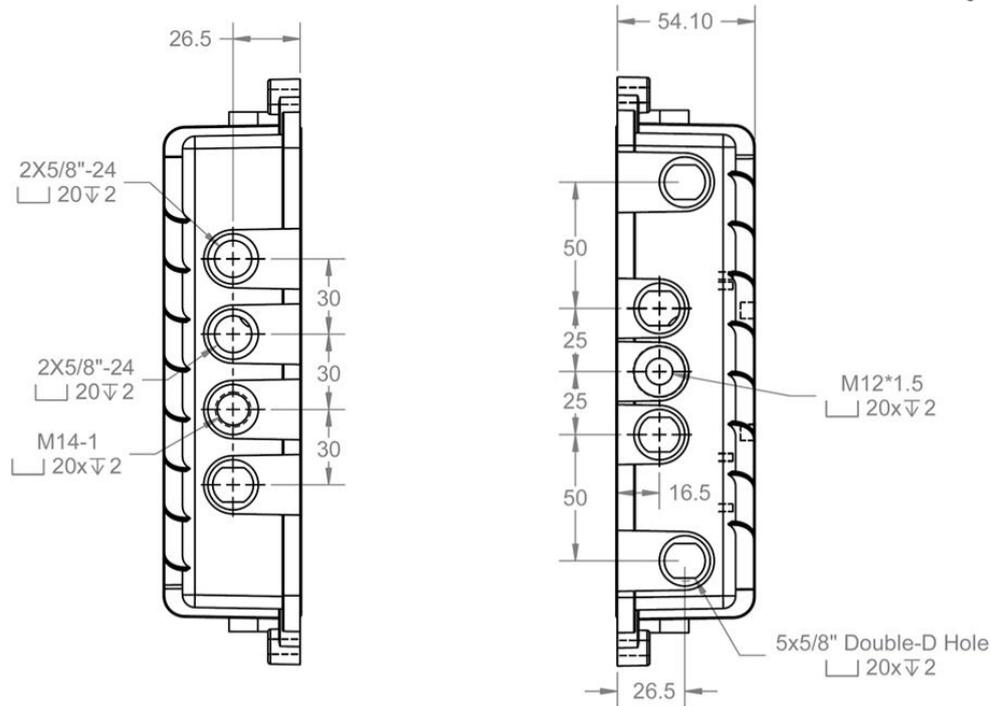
2D OUTLINE OF THE XBU ENCLOSURE
